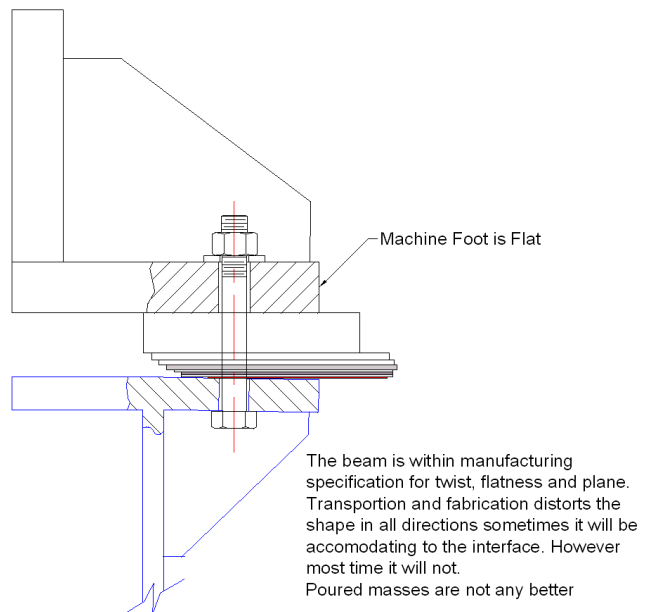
below shows unreliable shim installation. The real problem is the angular offset of the beam that is within tolerance for the beam fabrication. Skid fabrication may make the situation more challenging, and coupled with welding in a gusset, this typically pulls the mounting plan further out of plane.
